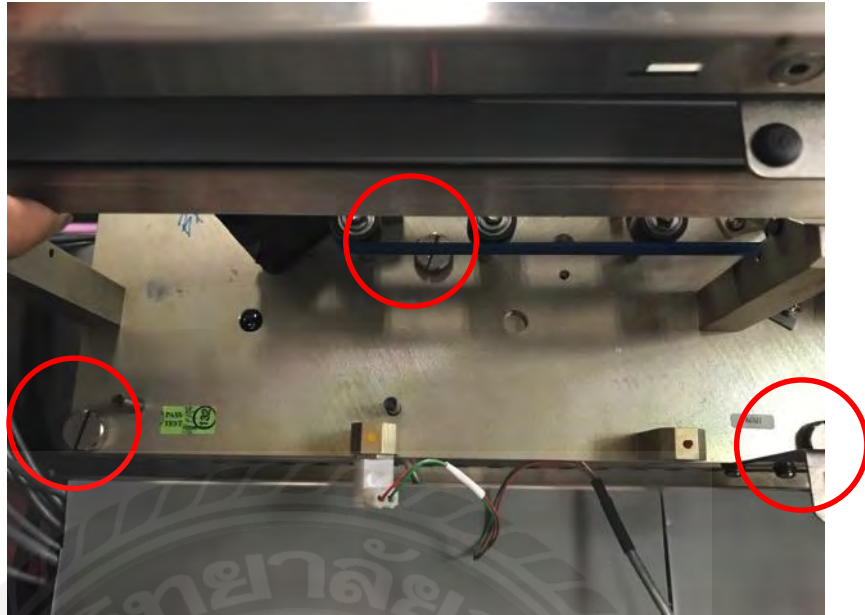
Location of Thumbscrew on the Passive Diverter
